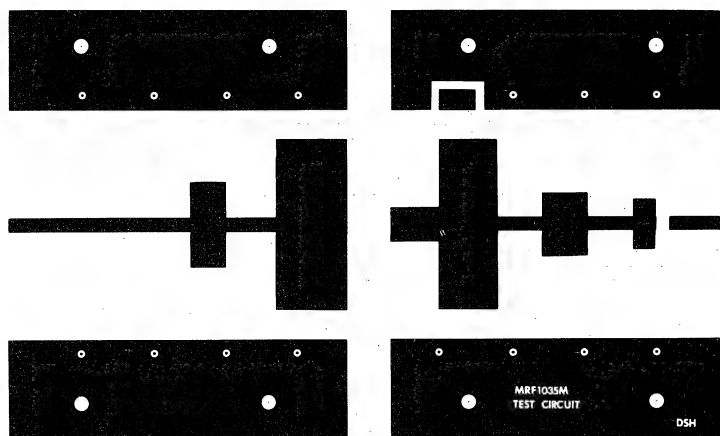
PRINTED CIRCUIT BOARD LAYOUT – 1090 MHz TEST CIRCUIT
